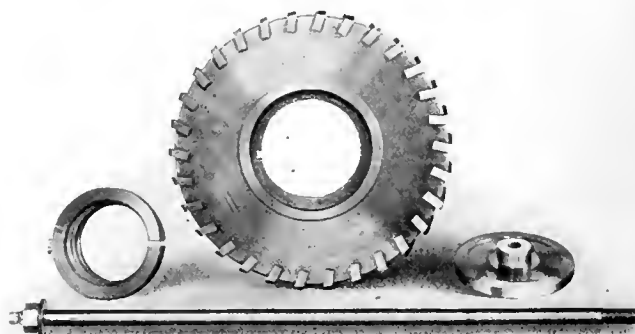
New Type Brown & Sharpe Inserted Blade Milling Cutter, with Sleeve, Clamping Plate and Drawing-in Bolt
